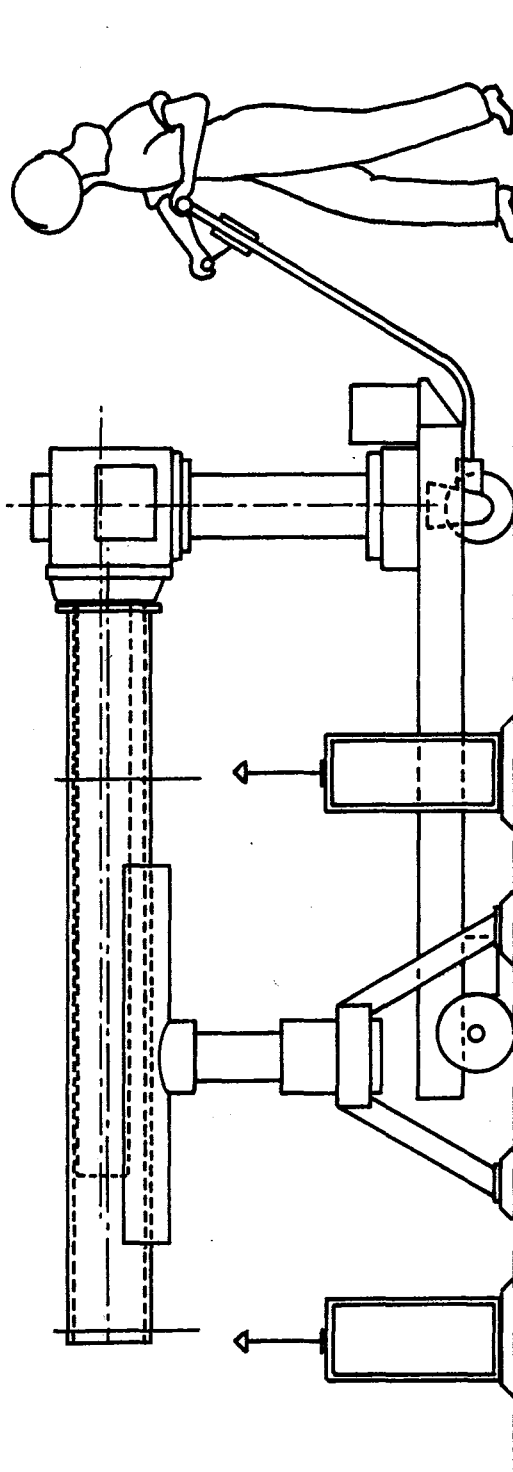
23 TORQUE TUBE PLACEMENT ON CRADLE
